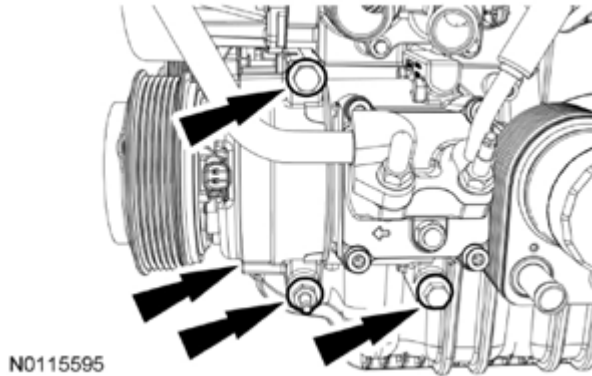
Locating A/C Compressor Bolts And Stud Bolt
